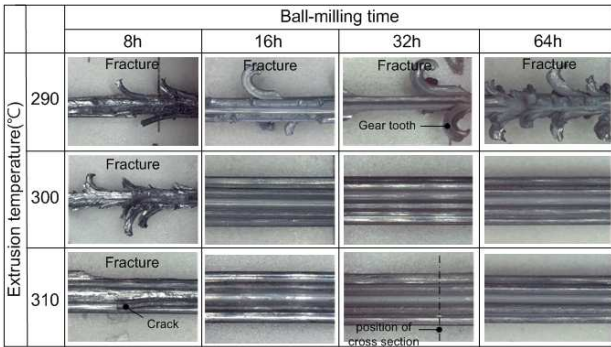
Surfaces of the spur gear extruded under different ball milling times and extrusion temperatures
